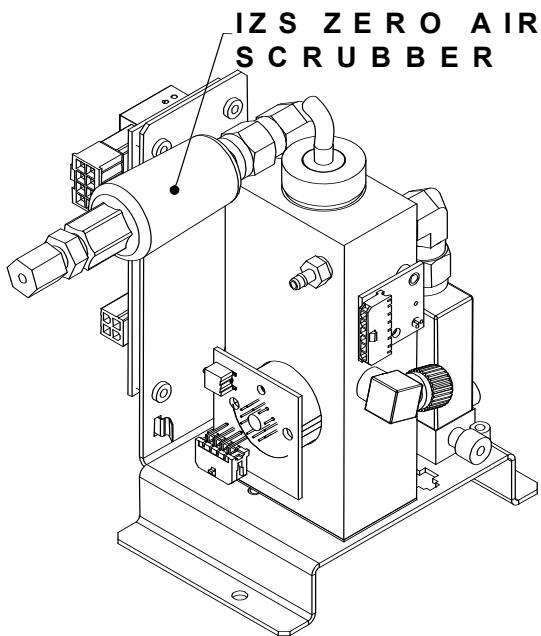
IZS O₃ Generator Zero Air Scrubber Location
